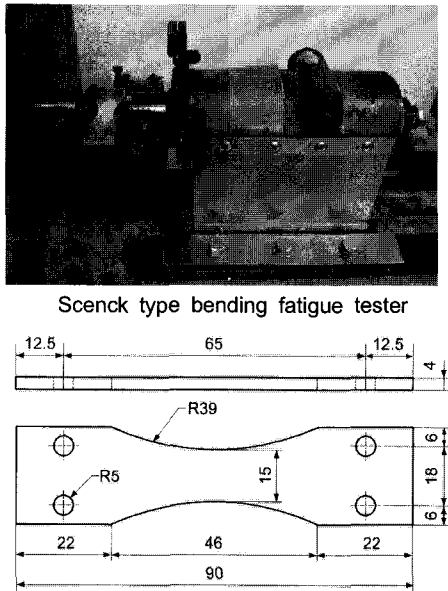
Configuration of test specimen used in scenck type bending fatigue tests
